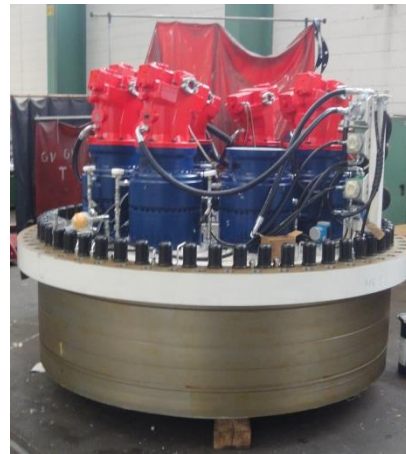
The completely preassembled drive unit, with plug-in gearboxes and hydraulic motors, is mounted on a 200 millimetre thick plate from Dillinger.
